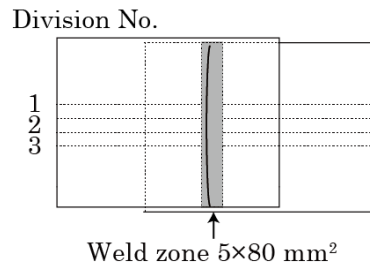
Collection of test piece (Division of welded sheets)
